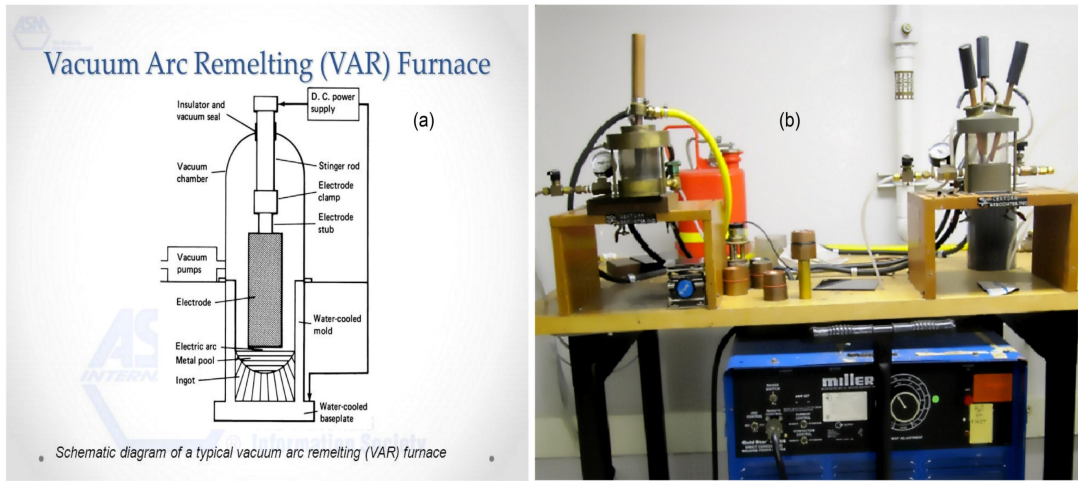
Arc melting (a) schematic diagram [96] (b) The single- and tri-arc furnaces, showing the front of the welding power supply [97].
